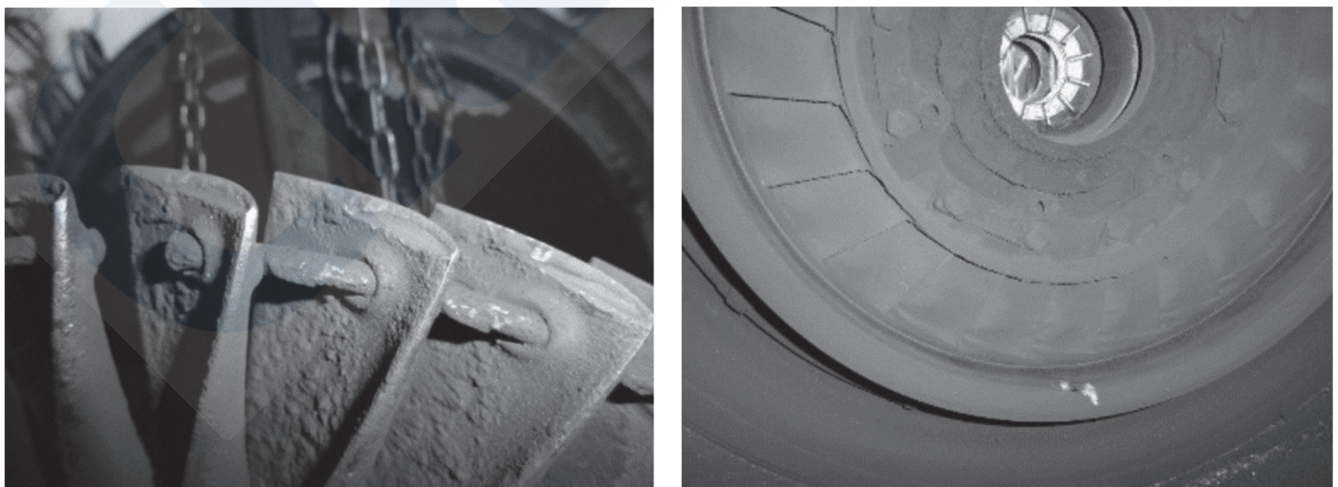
Turbocharger components fouling with soot - Turbine blades (left) and turbine nozzles (right)
